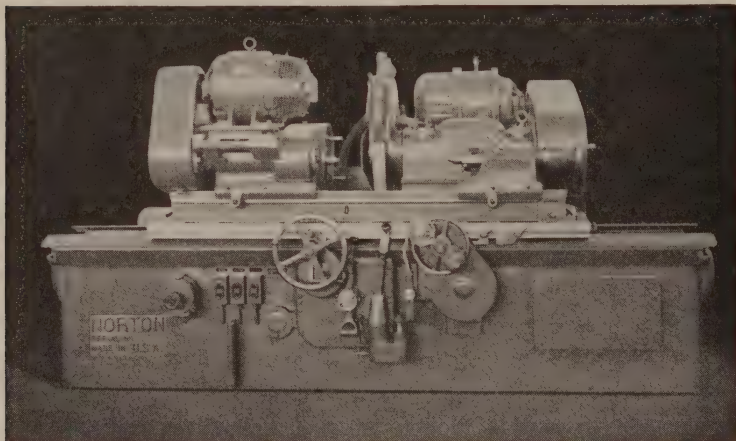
Plain grinding machine with hydraulic table traverse. Stock sizes up to 14 by 96 in. One electric motor drives the hydraulic and lubricating oil pumps, a second the work, and a third the wheel spindle. (Courtesy of Norton Company.)
